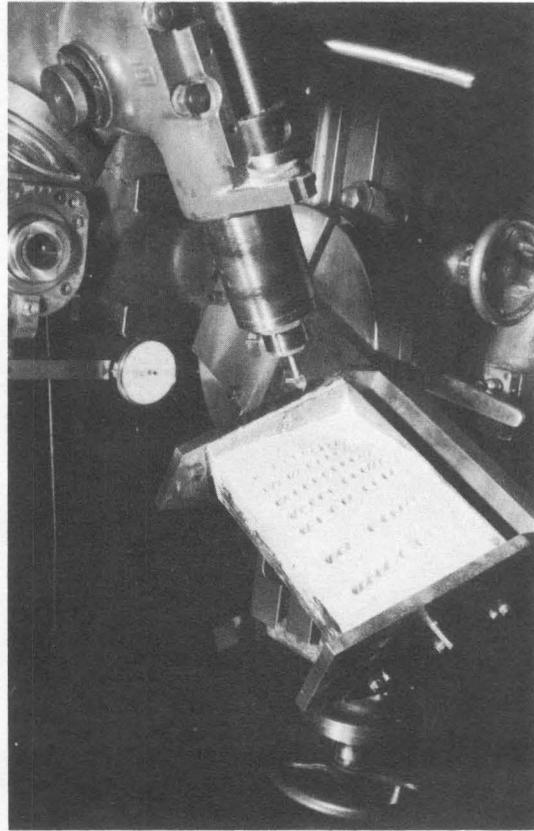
Spot machining a double size plastic surface for the pantograph milling operation.
